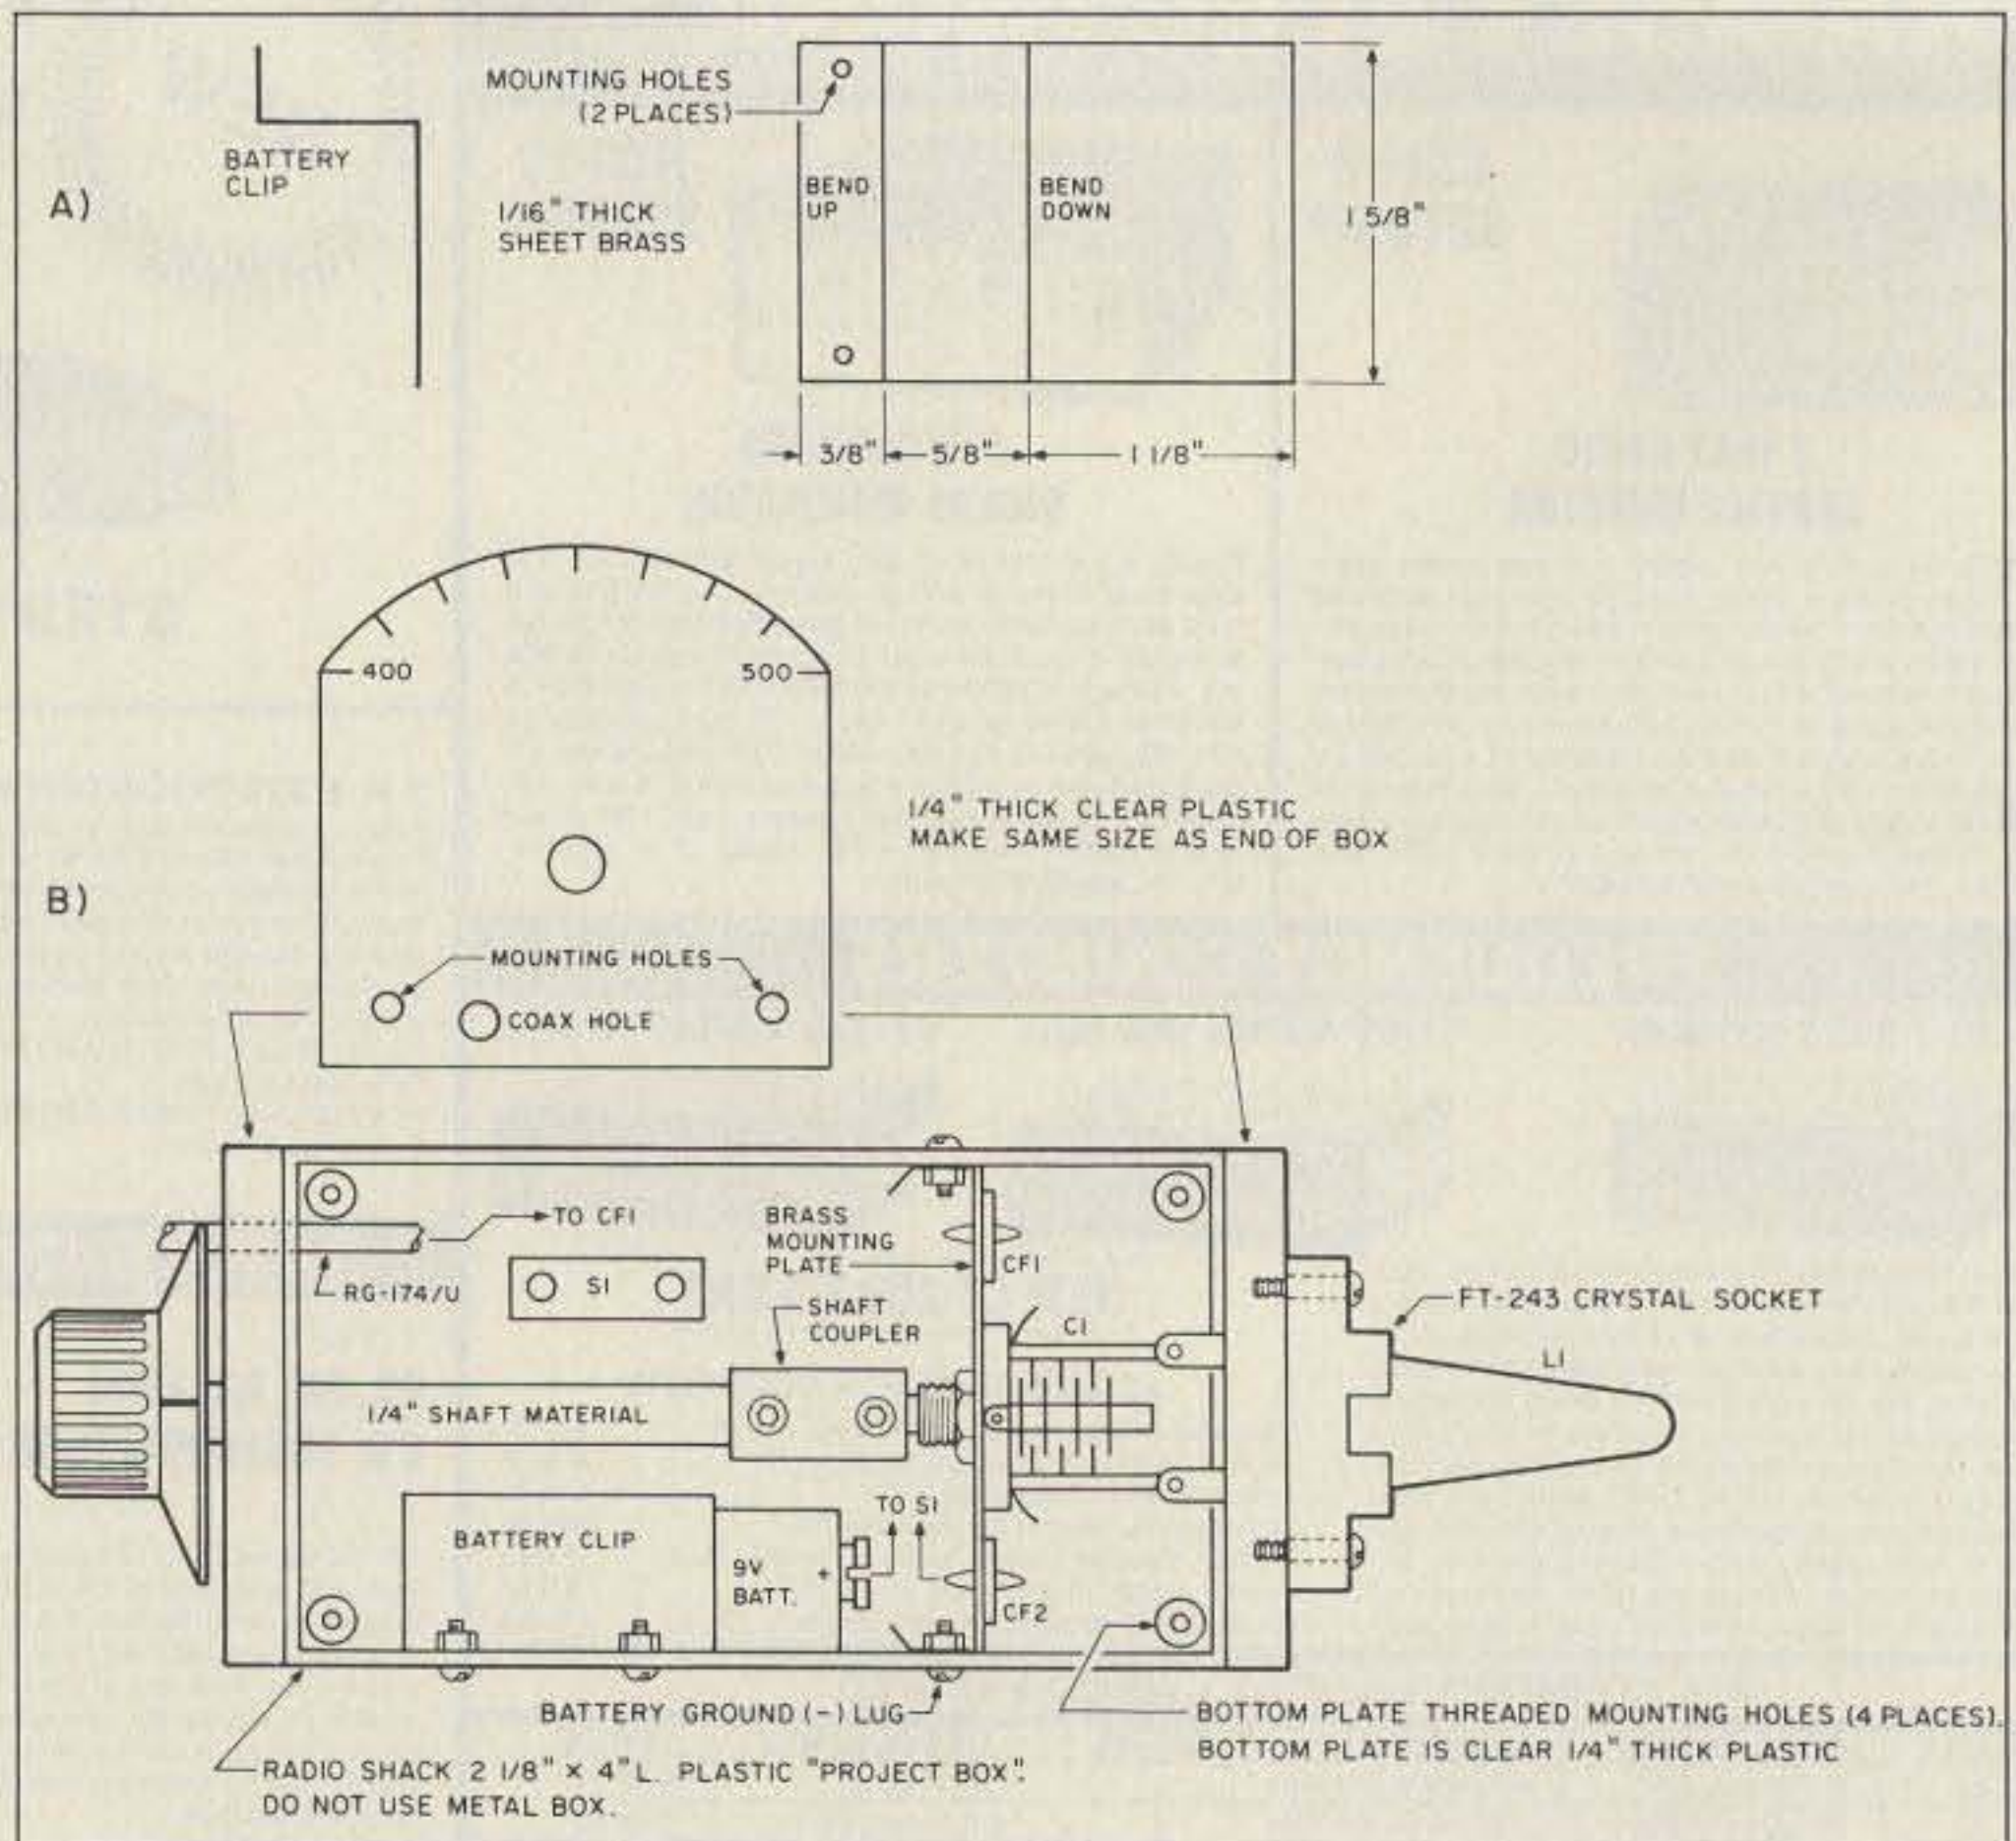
Battery clip (a) and bottom view showing parts placement (b).
